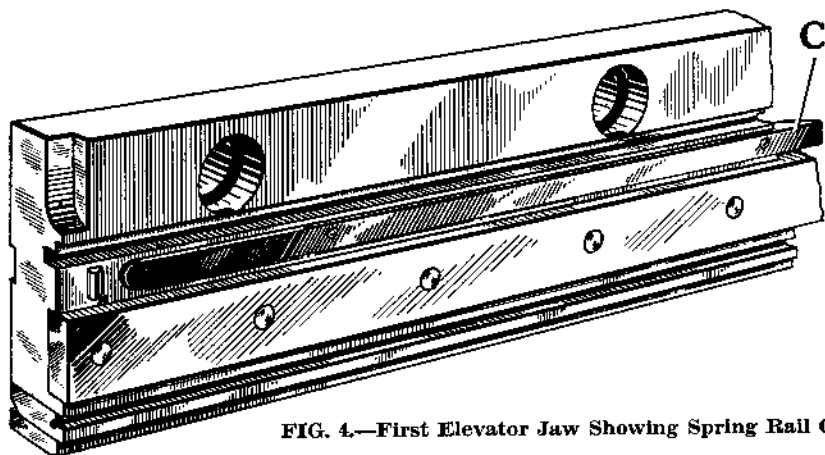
First Elevator Jaw Showing Spring Rail C.
